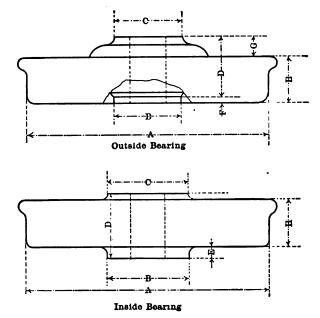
Sketch Showing Dimensions Needed by Manufacturer When Filling Order for Wheels.
